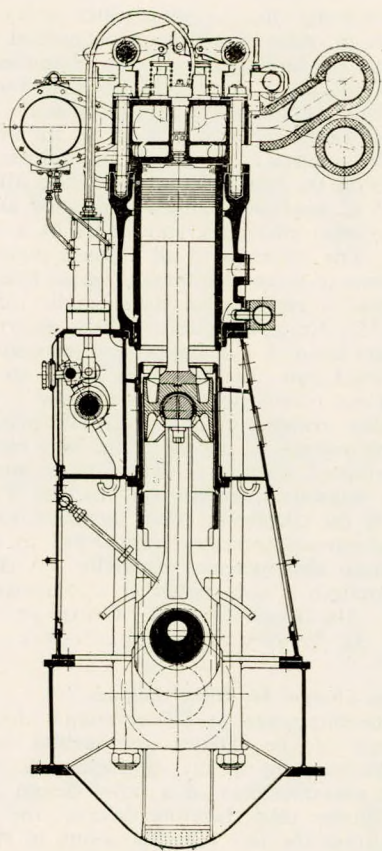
Cross-section through experimental welded-type M.A.N. engine, 300 mm. bore and 450 mm. stroke
